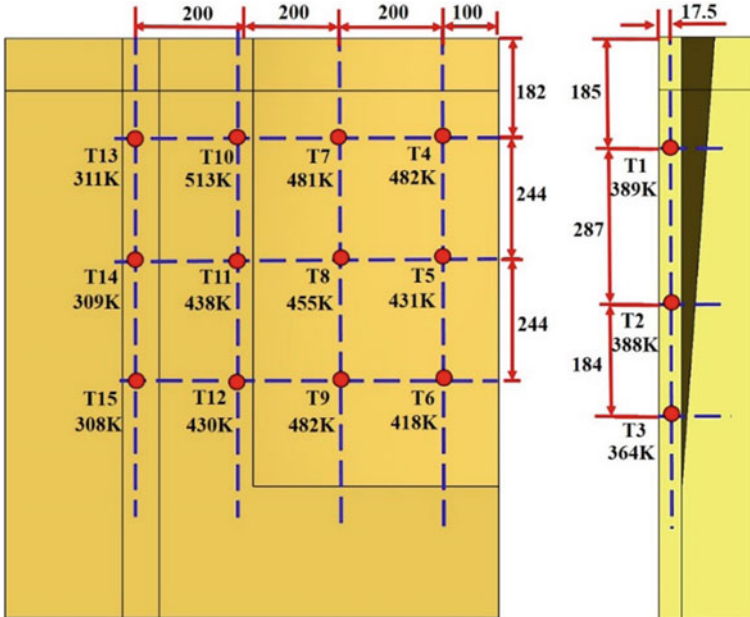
Location of thermocouples on wide (left) and narrow (right) faces of the mould
